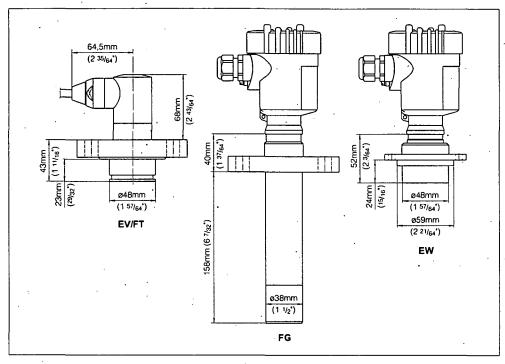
VEGABAR 64, extension fitting for paper industry: EV/FT = absolutely flush for pulper (EV 2-times flattened), FG = extension for ball valve fitting, EW = flange for manometer lug
